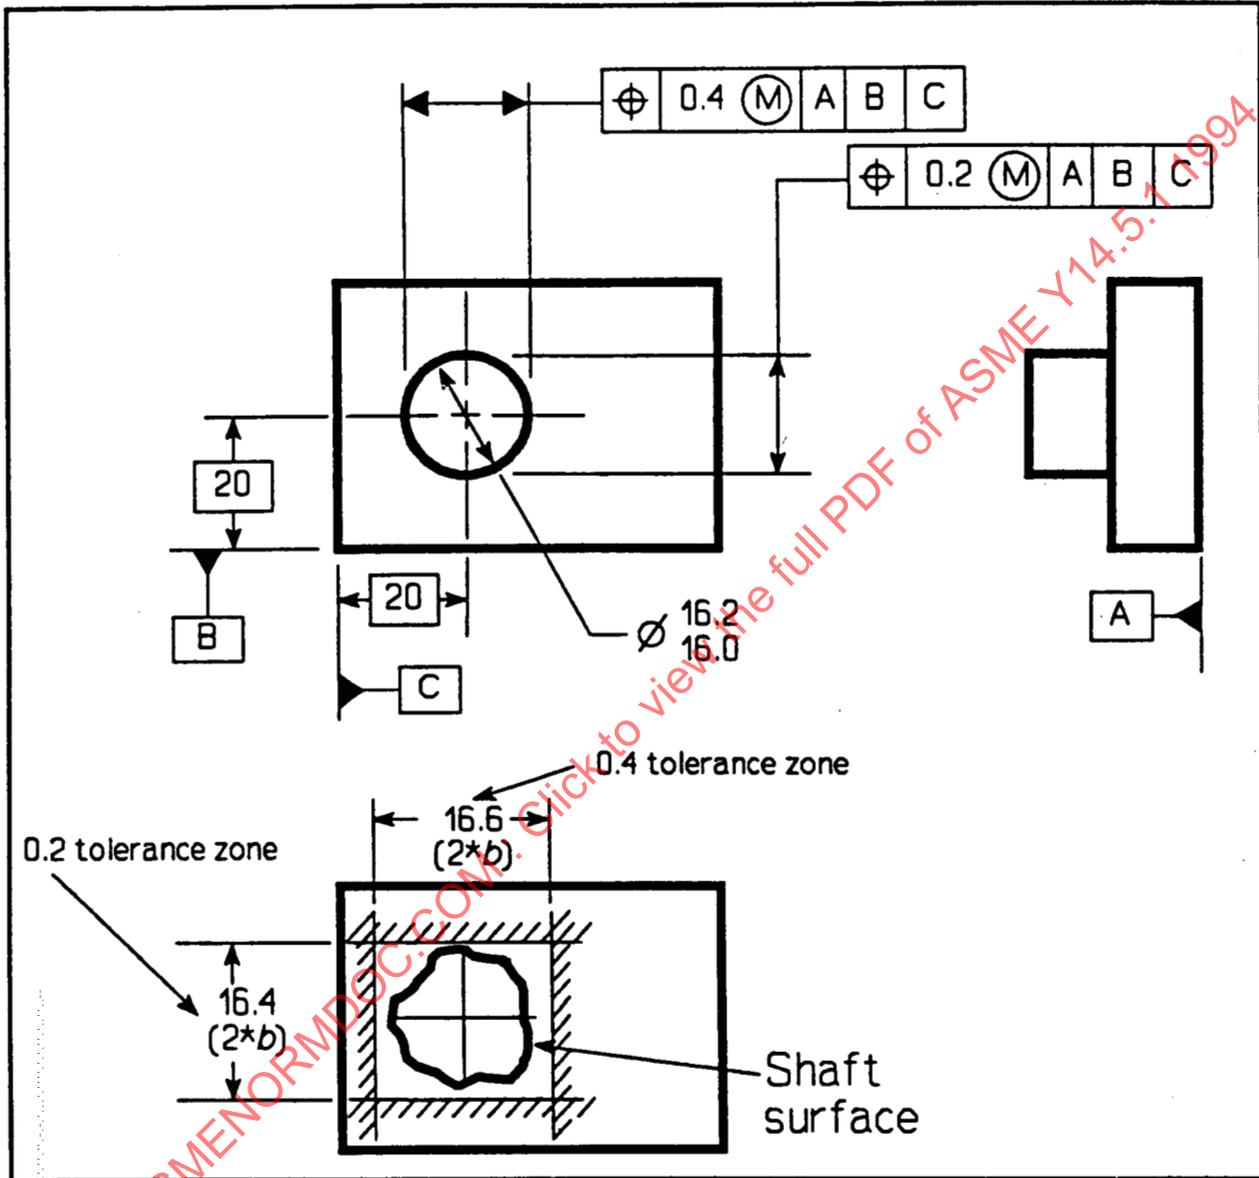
ILLUSTRATION OF BIDIRECTIONAL POSITION TOLERANCING OF A SHAFT AT MMC. THE TOLERANCE ZONE FOR EACH CALLOUT IS BOUNDED BY A PAIR OF PARALLEL PLANES
